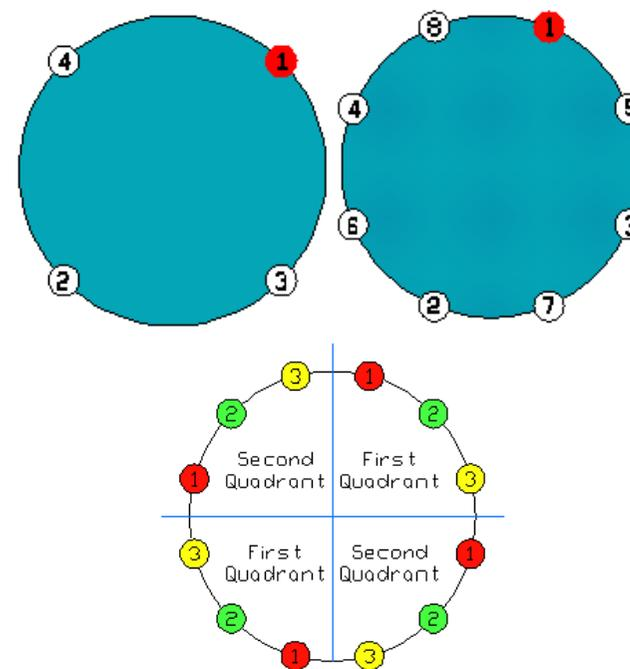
Bolt Tightening Sequence 4, 8 and 12 Bolts or More
